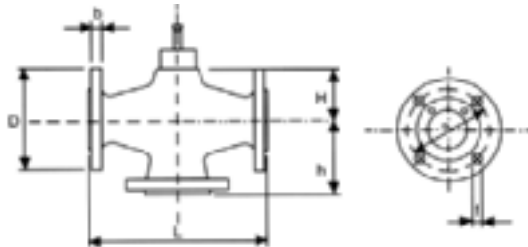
Three-Way Valve Body Dimensions, shown in inches (mm)
